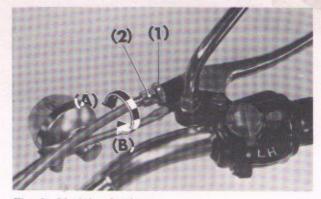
(1) Lock nut (2) Front brake cable adjuster
